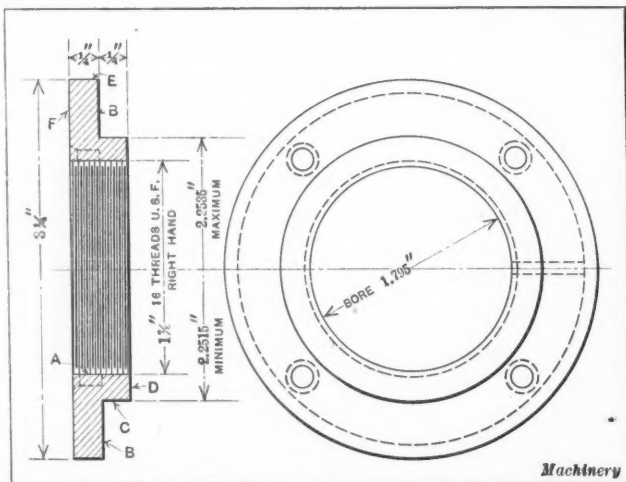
Clutch Flange Nut on which Turning and Facing Operations are performed on Bardons & Oliver No. 4 Turret Lathes
